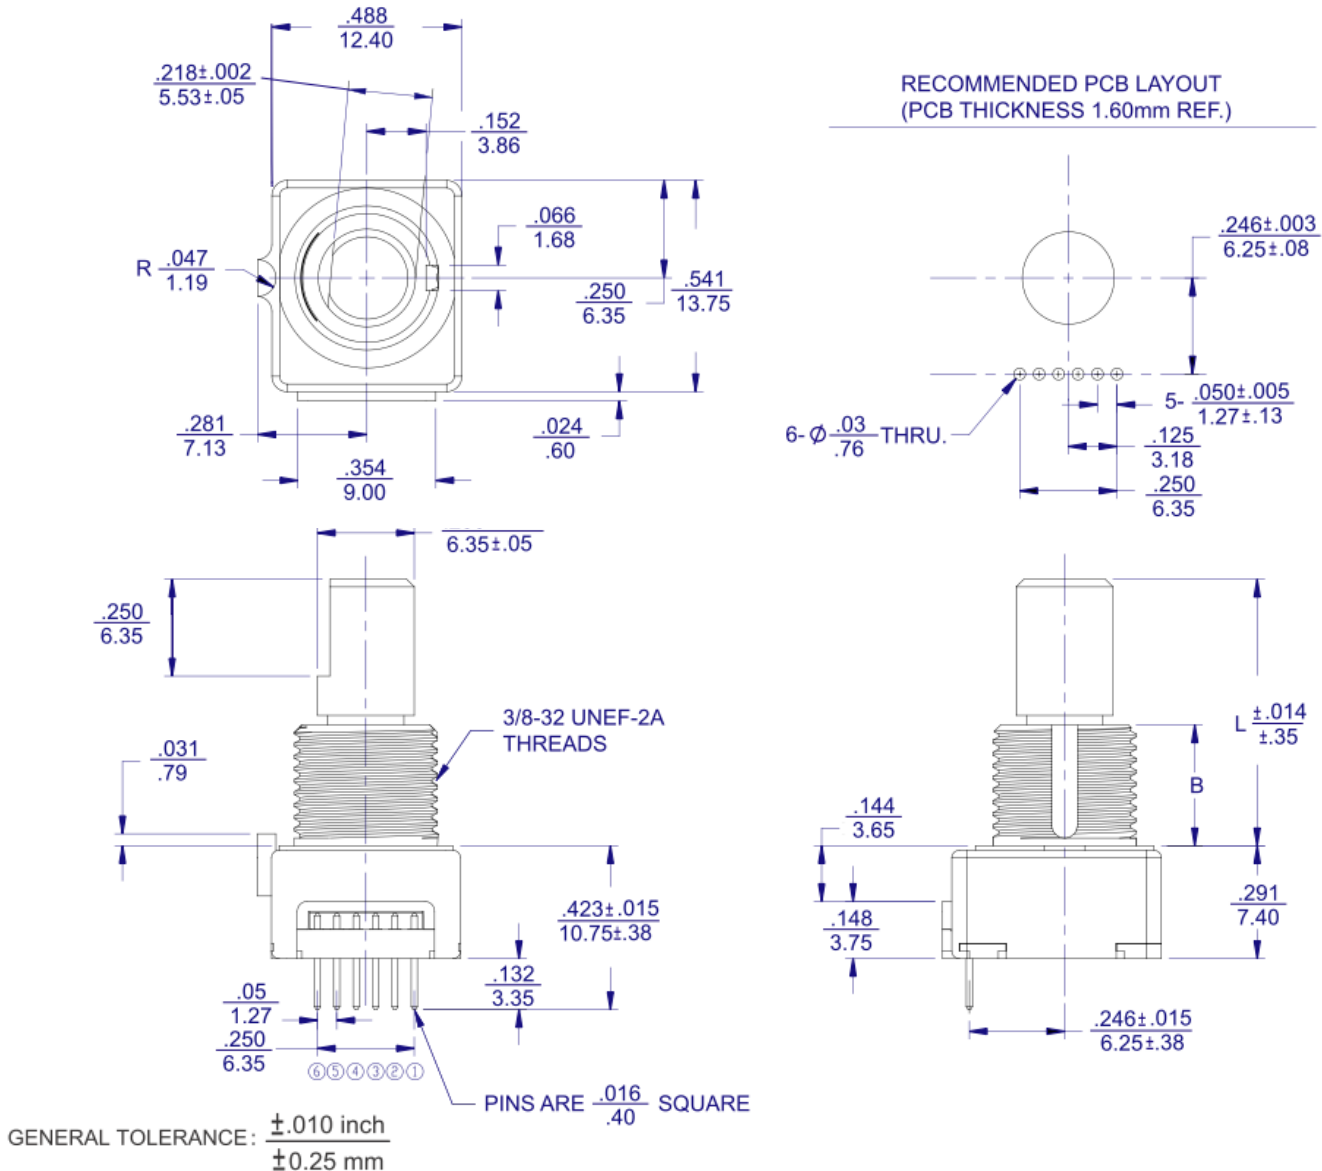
291V1...S – With Schmitt Trigger, Without Locating Lug, .050" Pitch Pins Facing Rear
